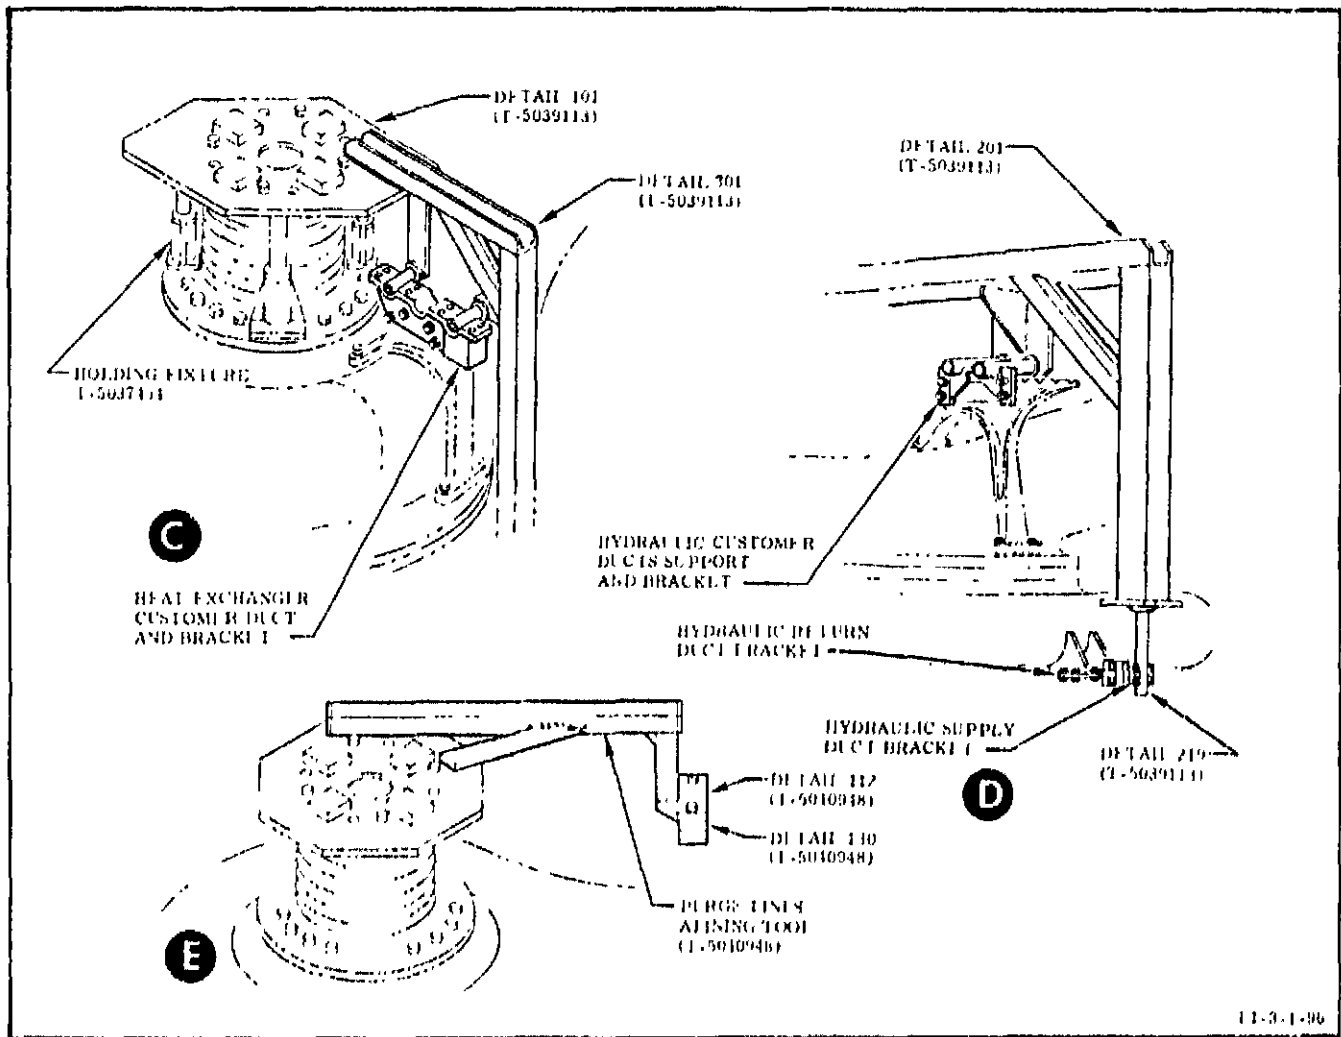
Alining Heat Exchanger Ducts, Hydraulic Ducts, Purge Lines, and Support Brackets (Sheet 2 of 2)
